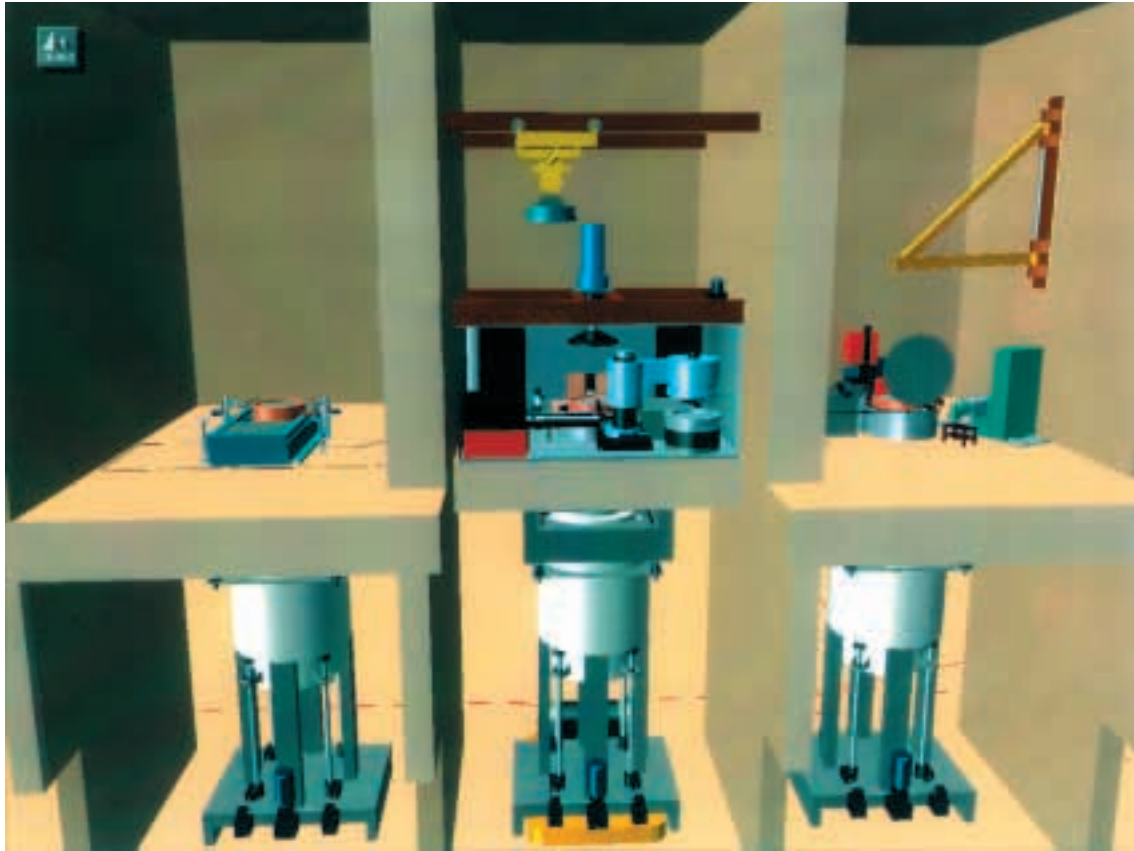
Three stations in the encapsulation plant: testing of the leak-tightness of the insert, welding, nondestructive testing and machining of the weld.
